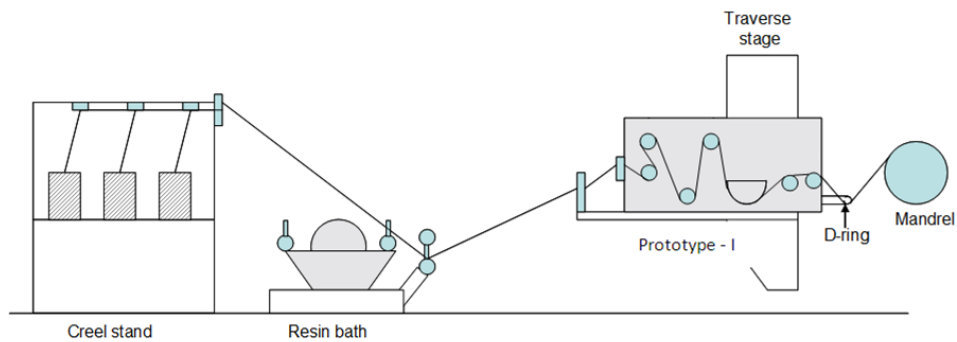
A schematic showing Prototype-1 mounted on the industrial filament winding machine. The Prototype-1 impregnator unit has been enlarged to highlight the key components.
